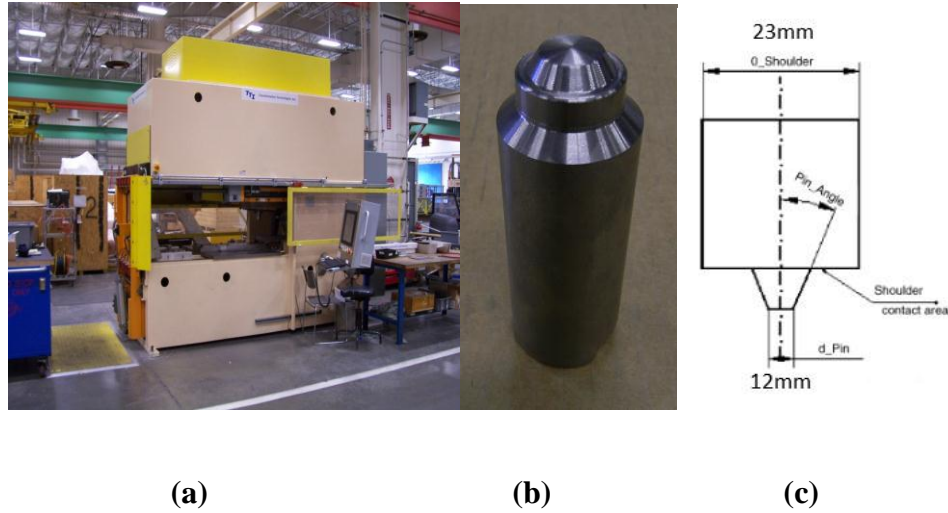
(a) Friction stir weld machine (b) Tungsten-Lanthinide friction stir weld tool. (c) Pin schematic.
